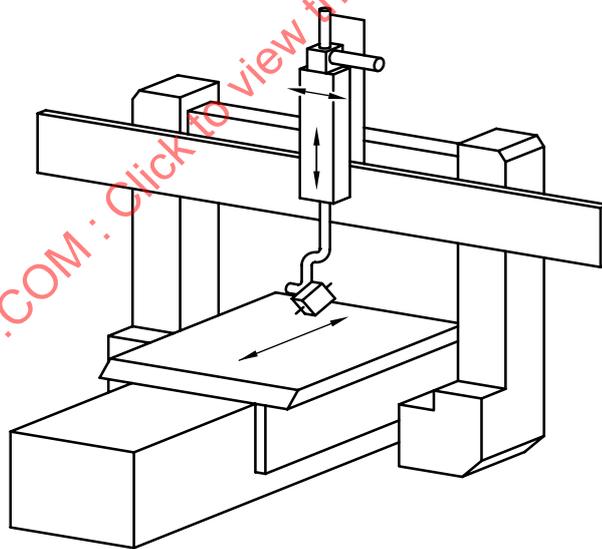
Example of a machining centre with moving table, fixed portal, moving machining head
